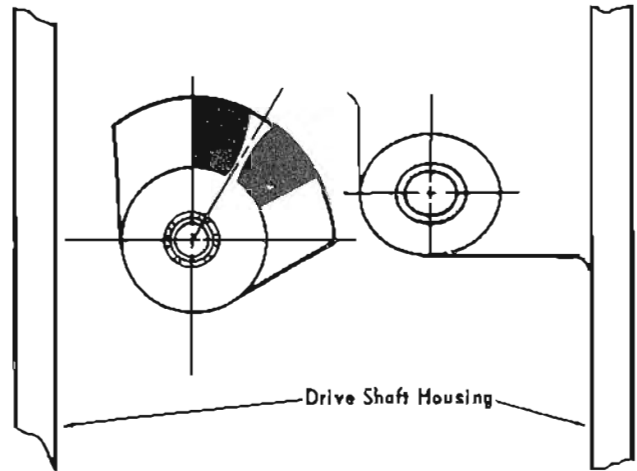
Cam Position - Forward Gear, Left Hand Rotation
